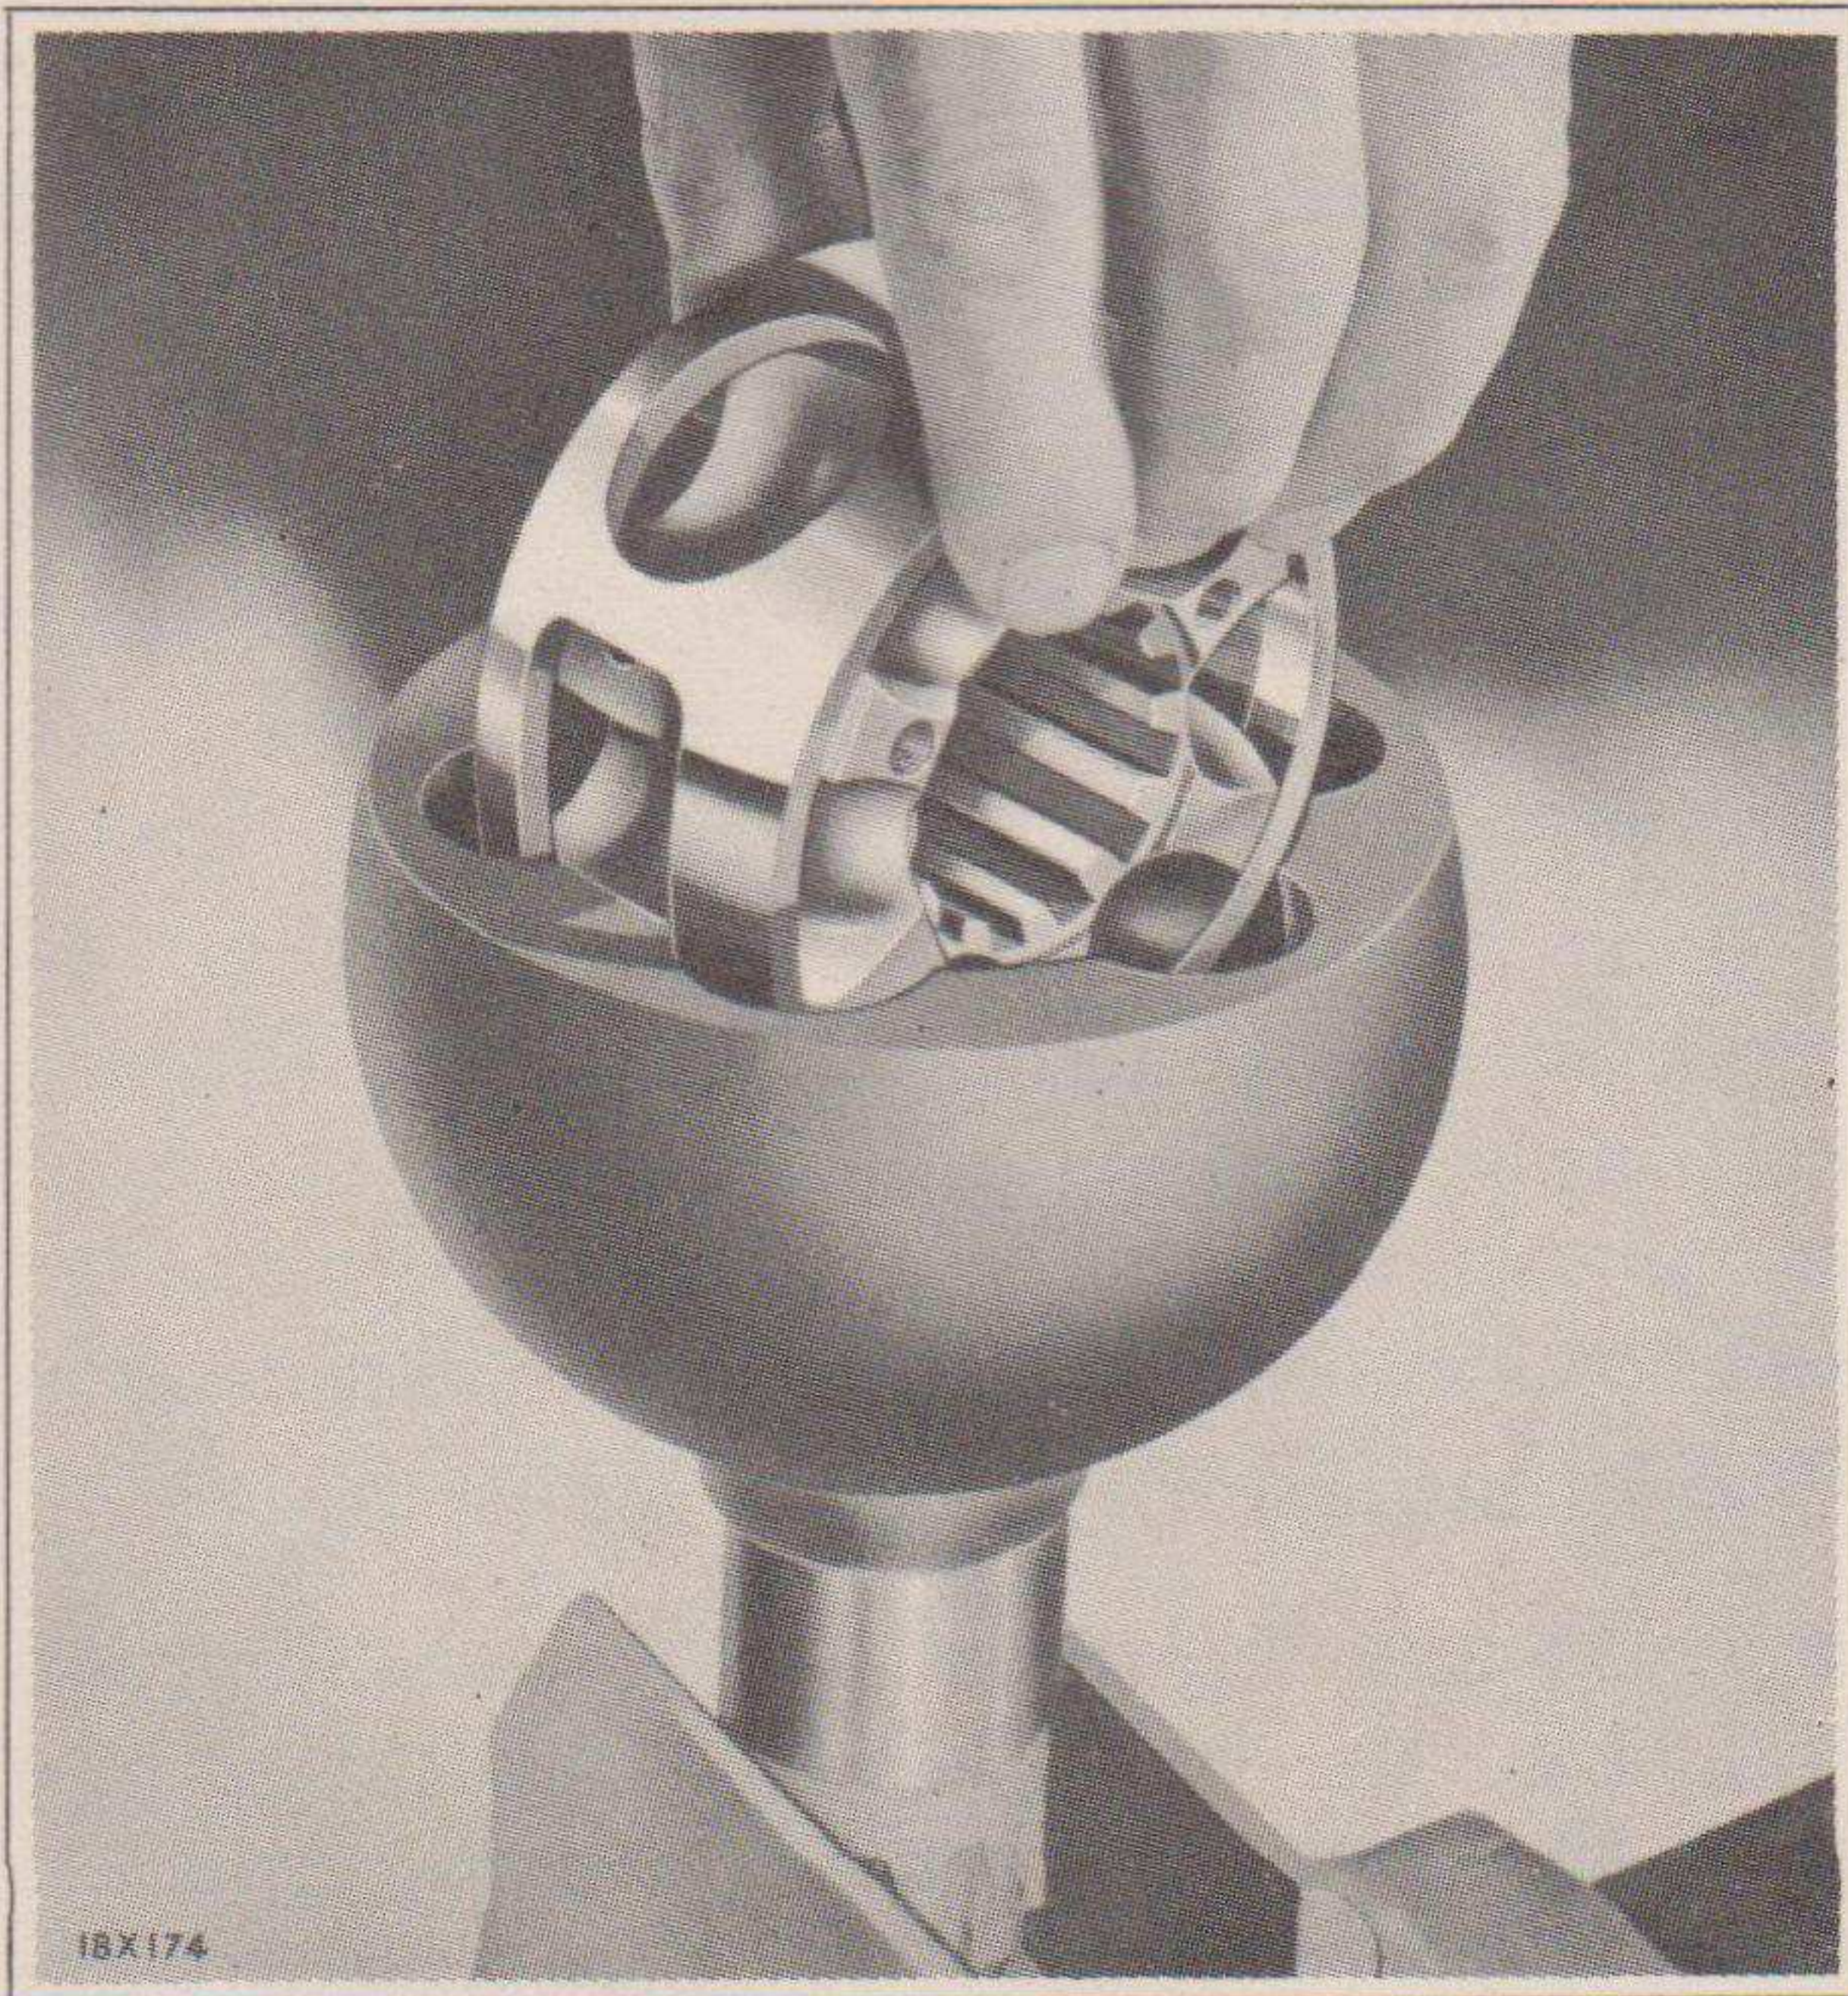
Removing Universal Drive Inner Race and Ball Cage (Rzeppa)
